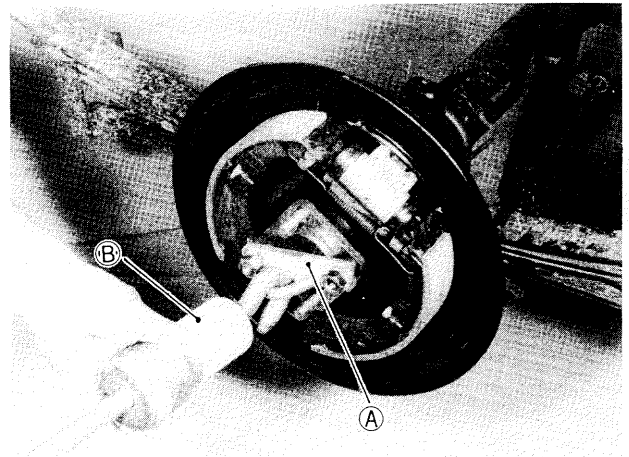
(A) Special tool (Brake drum remover 09943-35511)
